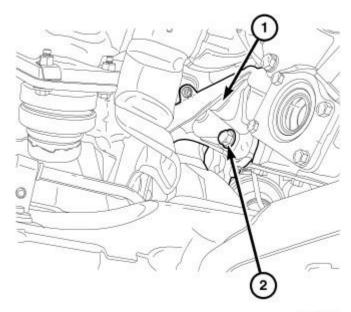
Rear Mount & Bolts Courtesy of CHRYSLER LLC
